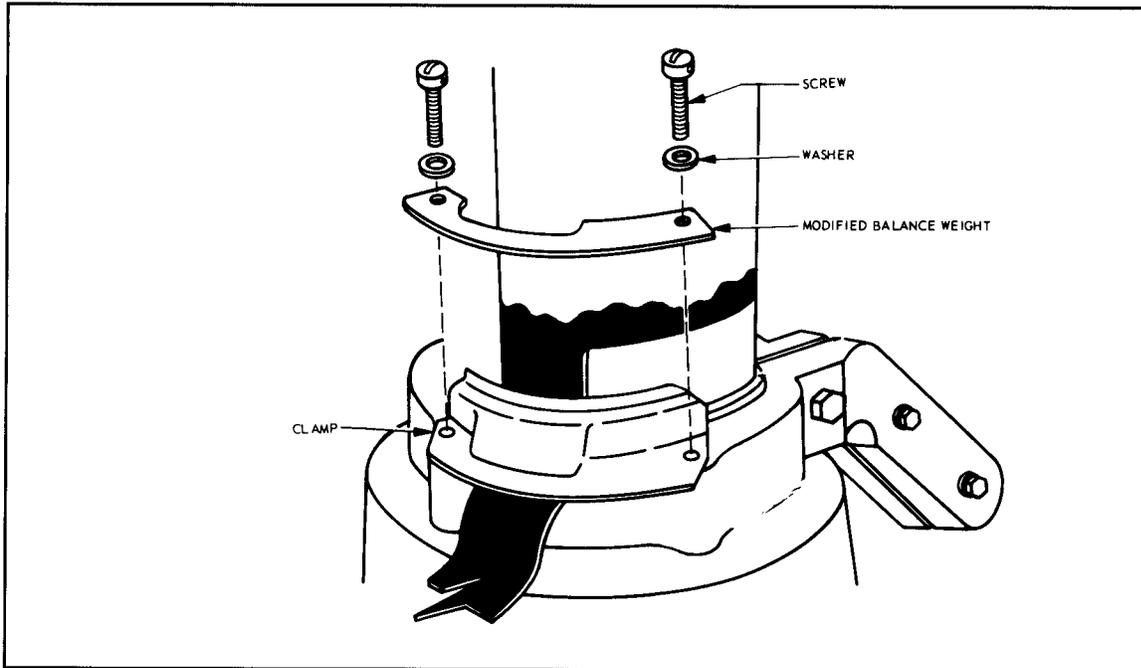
Modified Balance Weight/Lead Strap Clamp (P/N 4E1725) Installation
